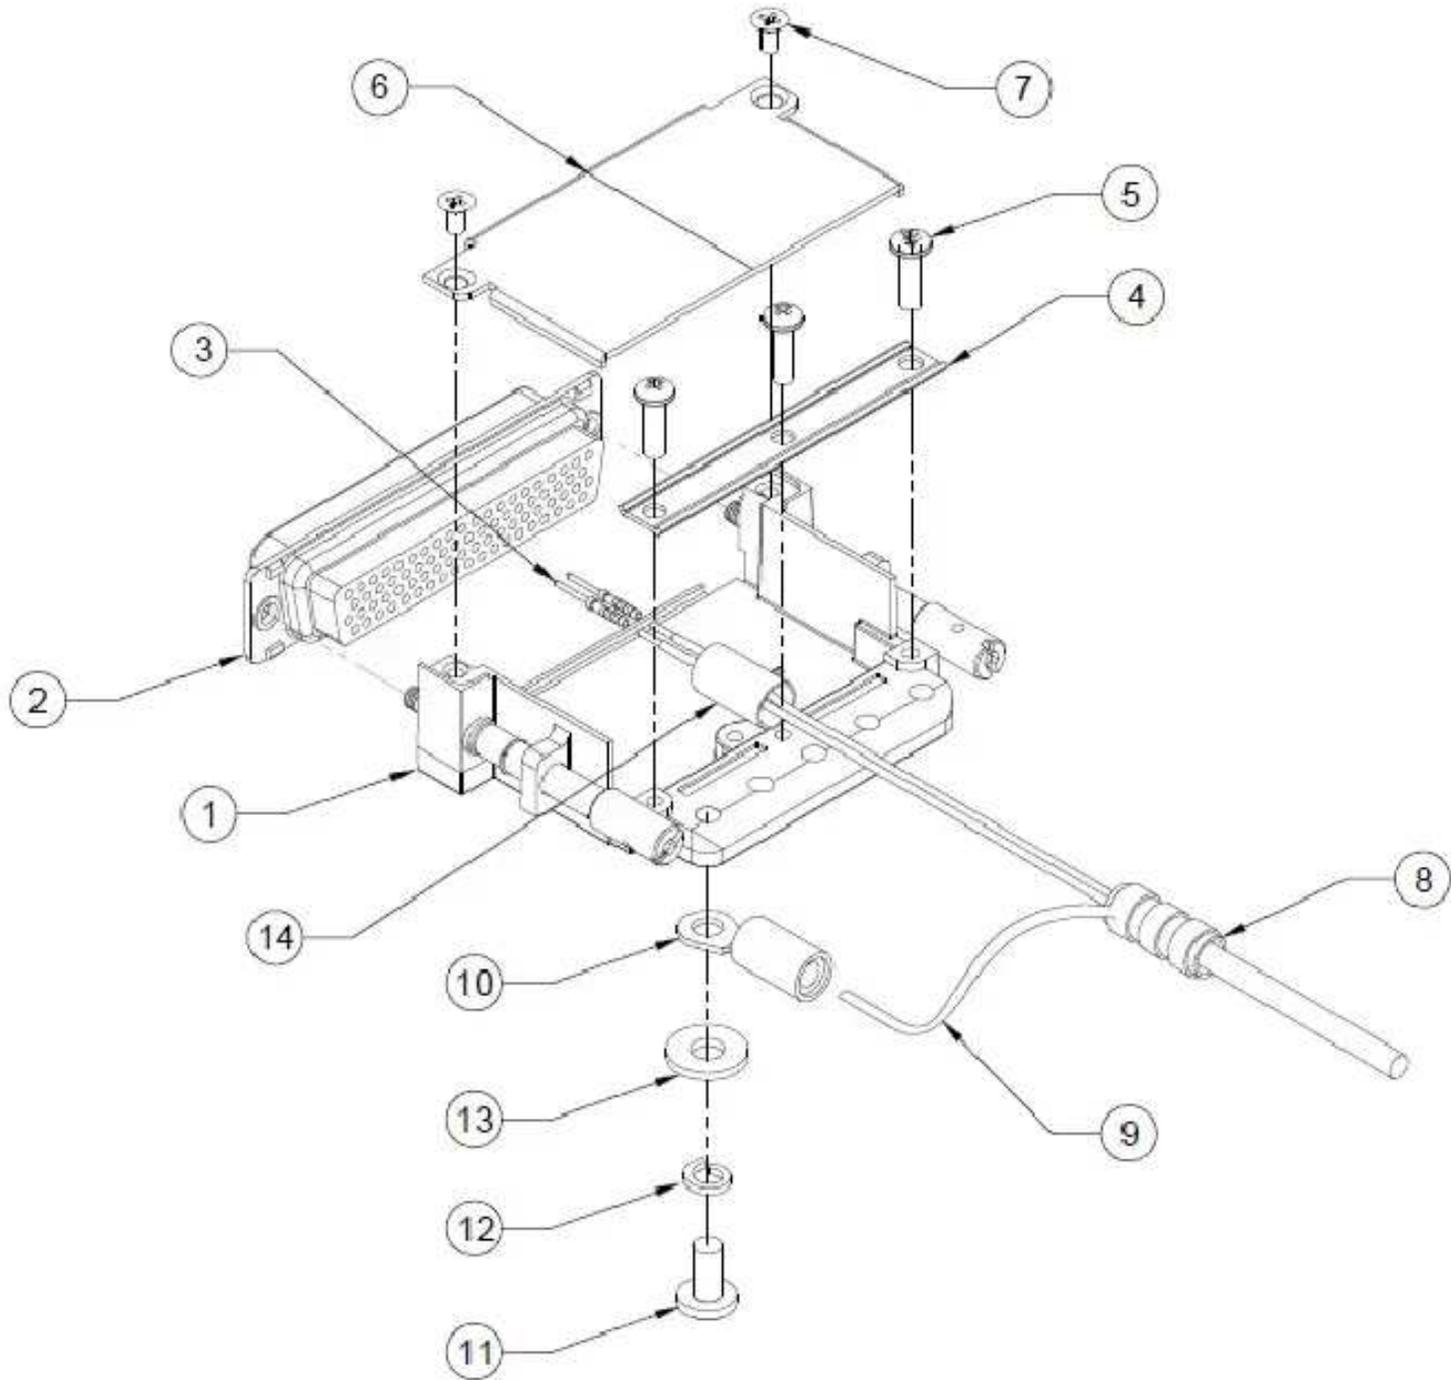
GSA 28 Wiring Harness Connector Assembly
